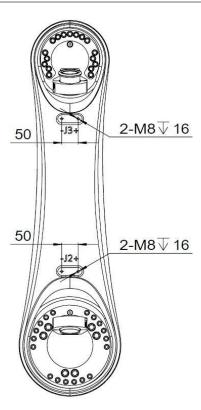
AIR50-2260/AIR80-2260 upper arm interface dimensions
